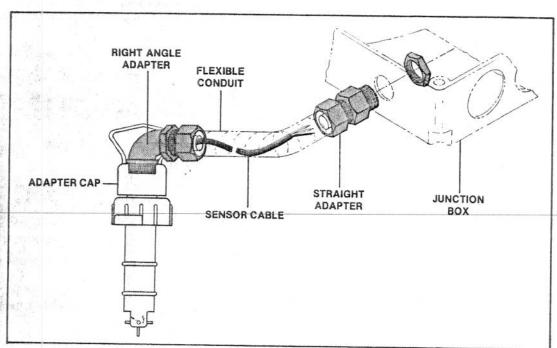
Detailed drawing of the MK 515.89 Sensor Conduit Kit.
